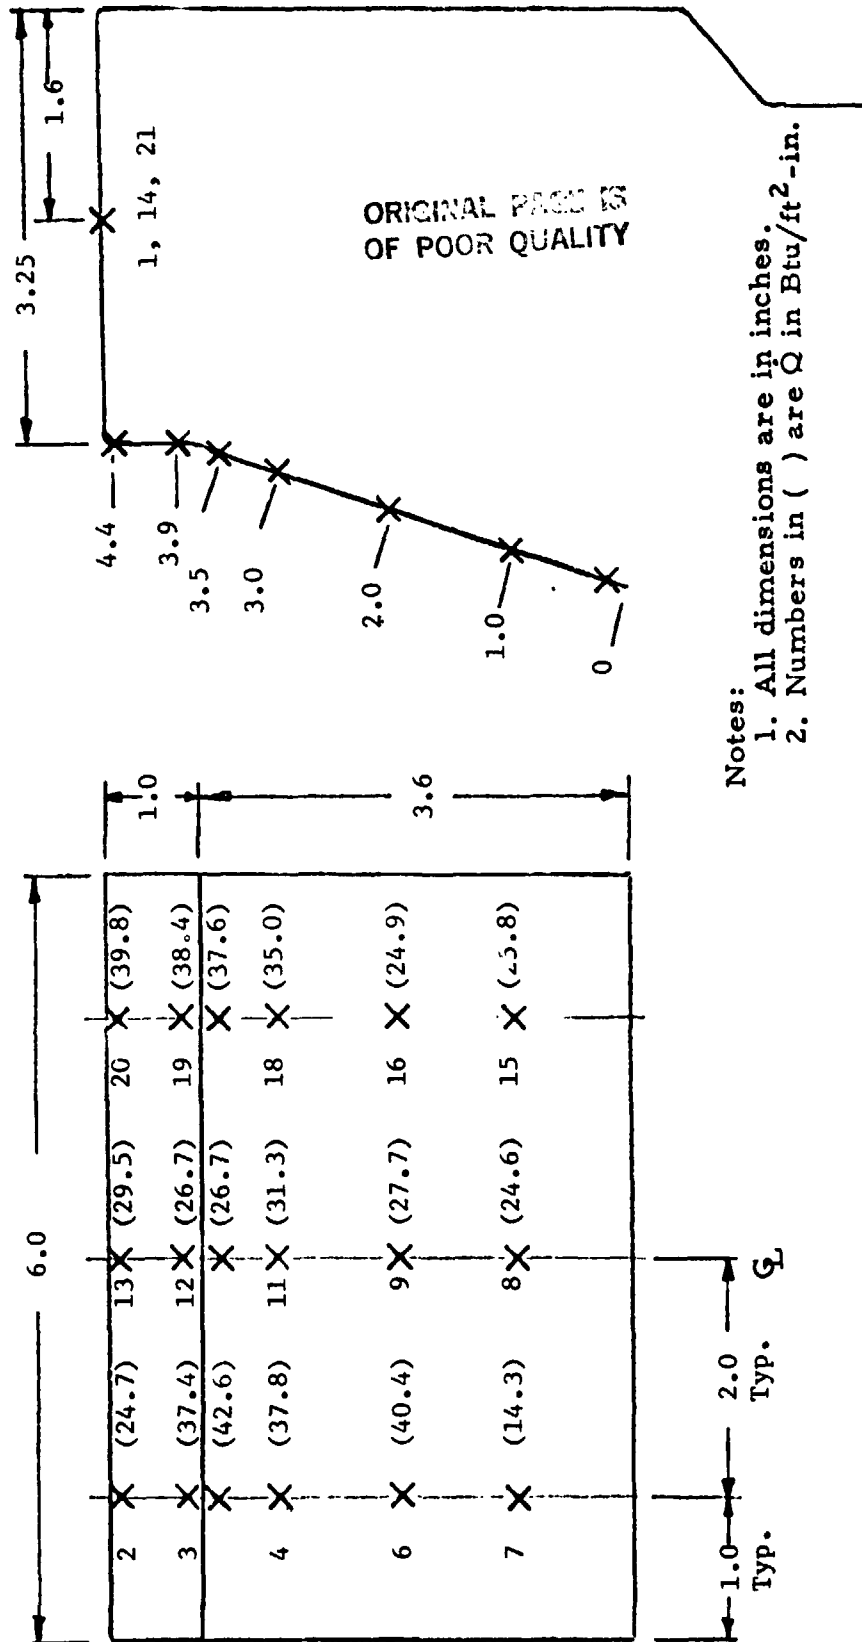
Front and Side View of Kick Ring Rear Face Thin Skin Thermocouple Cal Model Showing Measured Heating Rates (Run 1144)
